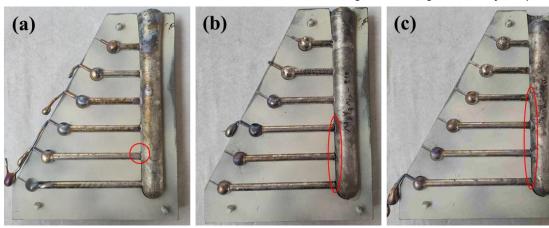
Macrocracks pictures of hot tear mechanical in castings: (a) Mg-1.5Y-3Ni, (b) Mg-3Y-3Ni and (c) Mg-4.5Y-3Ni.
